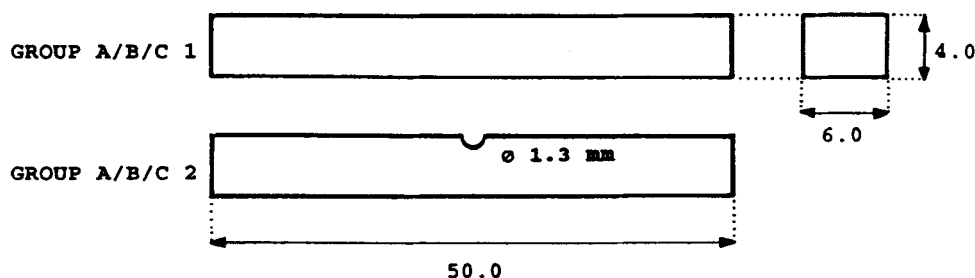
Shape and dimensions (in mm) of the test specimens.
